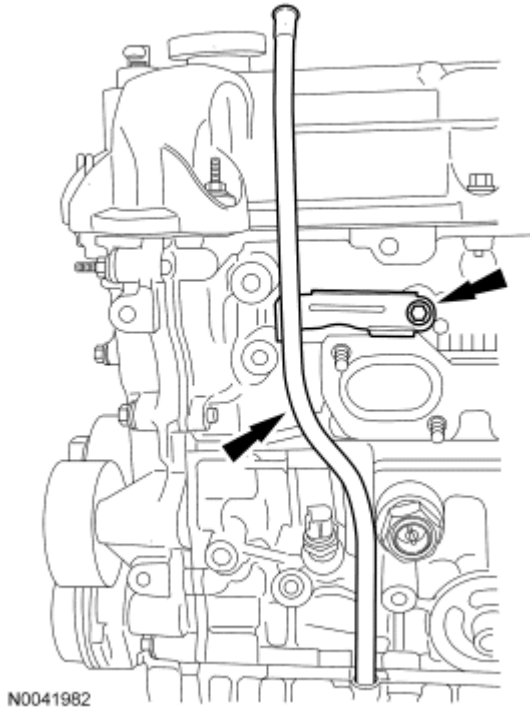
Locating Oil Level Indicator Tube And Bolt
